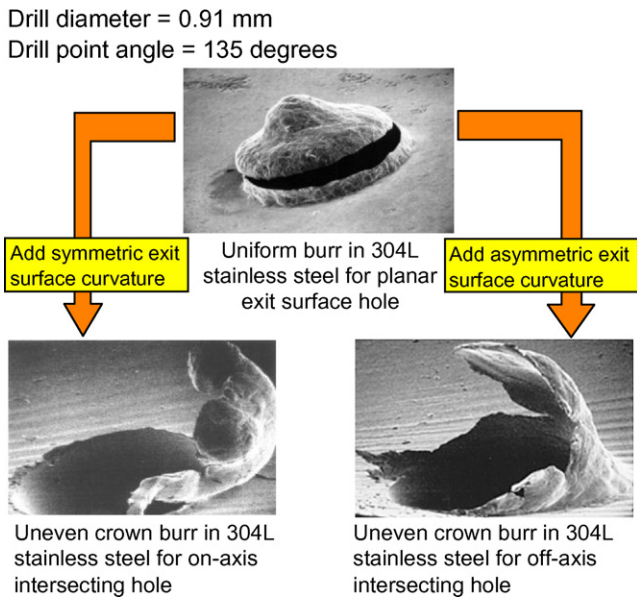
Burrs from on- and off-axis intersecting holes [143].
